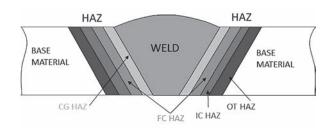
Welded joint; Base material, HAZ (heat affected zone), Weld material
